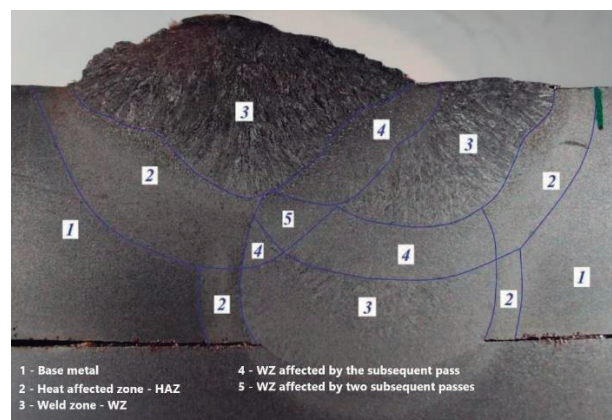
Macrostructure of the welded joint for A242 steel
